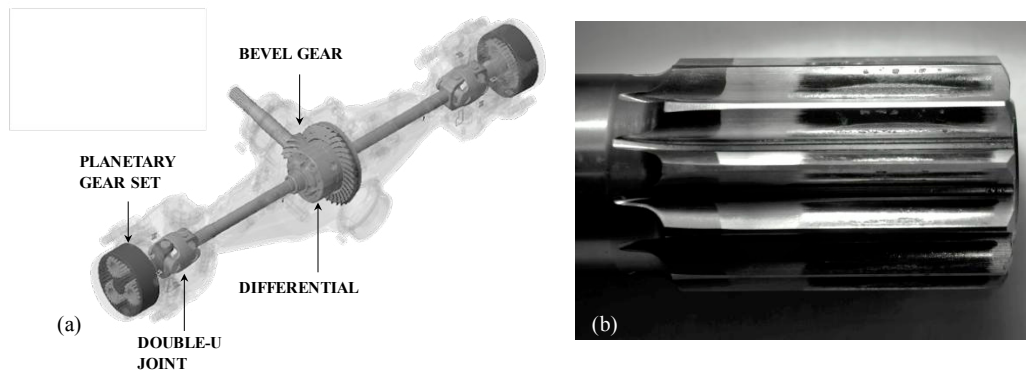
a) Scheme of an off-highway axle. b) sun gear damaged by pitting.
